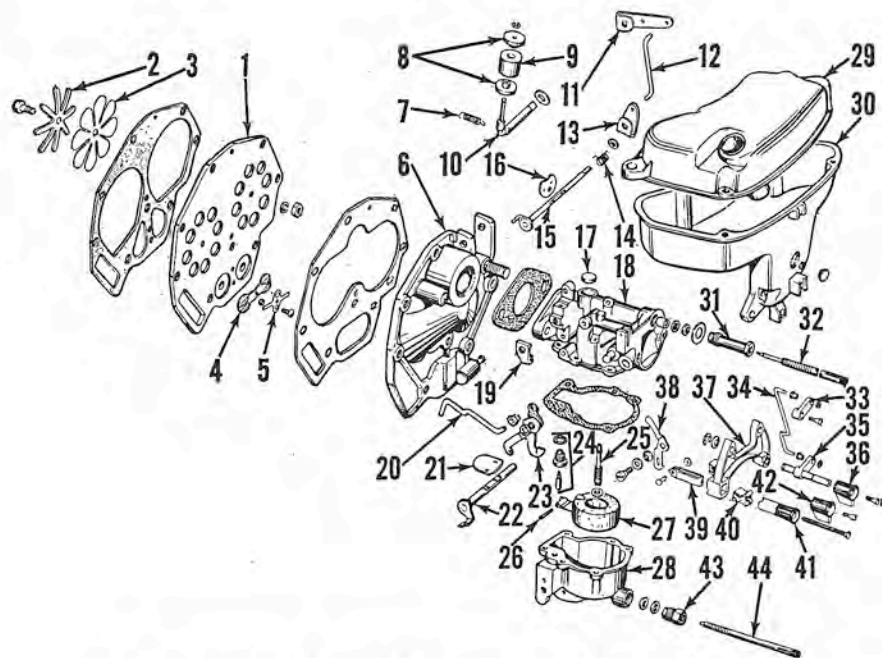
Late model Sportwin carburetor, Fastwin models are similar.
